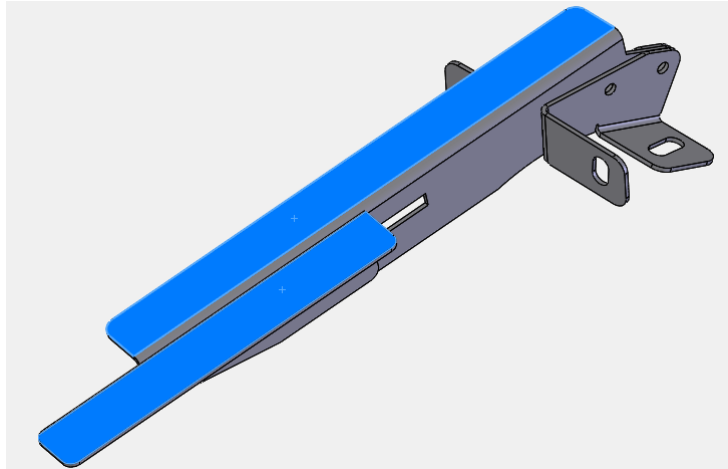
Bracket Faces to Apply Silicone to (Driver Side Shown)
